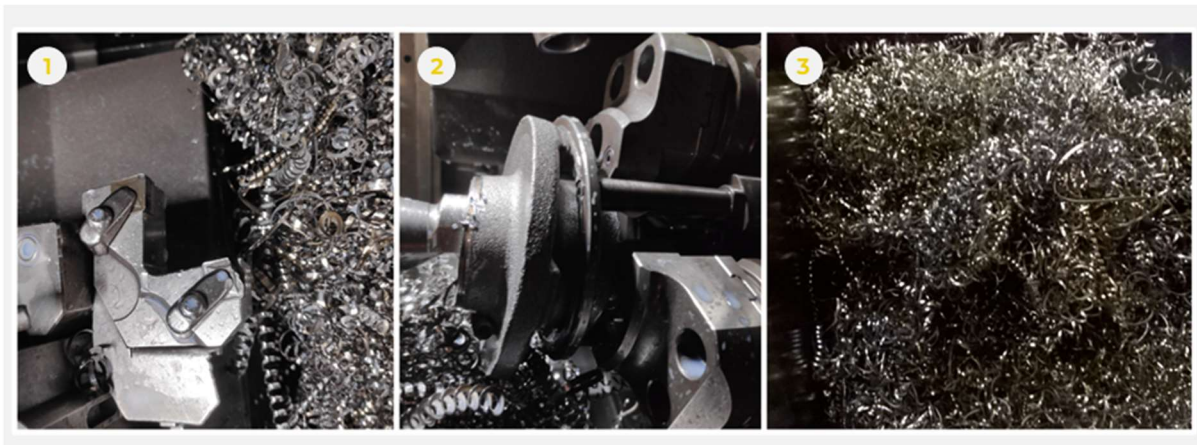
Process uncertainty due to insufficient chip breaking in wheel bearing production [1]
